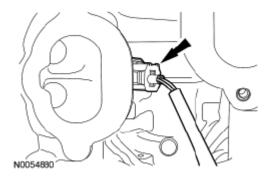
Locating CHT Sensor Jumper Harness Courtesy of FORD MOTOR CO.
